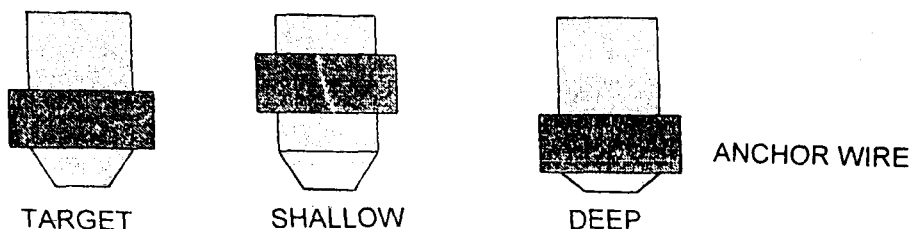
USE OF ANCHOR WIRE IN TUFTING
